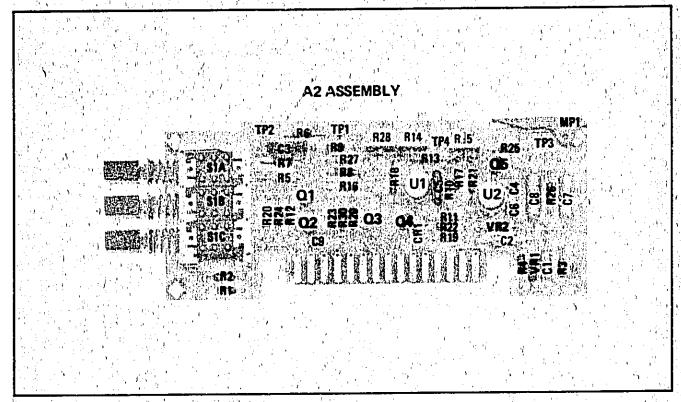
A2 Meter Switch and Drive Assembly Component Locations
